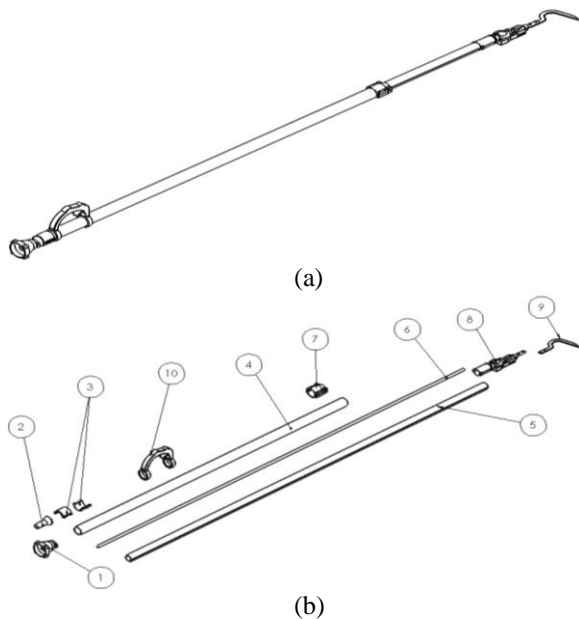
(a) Assembly drawing of the mechanical oil palm harvester (b) Mechanical oil palm harvester's components [4]
